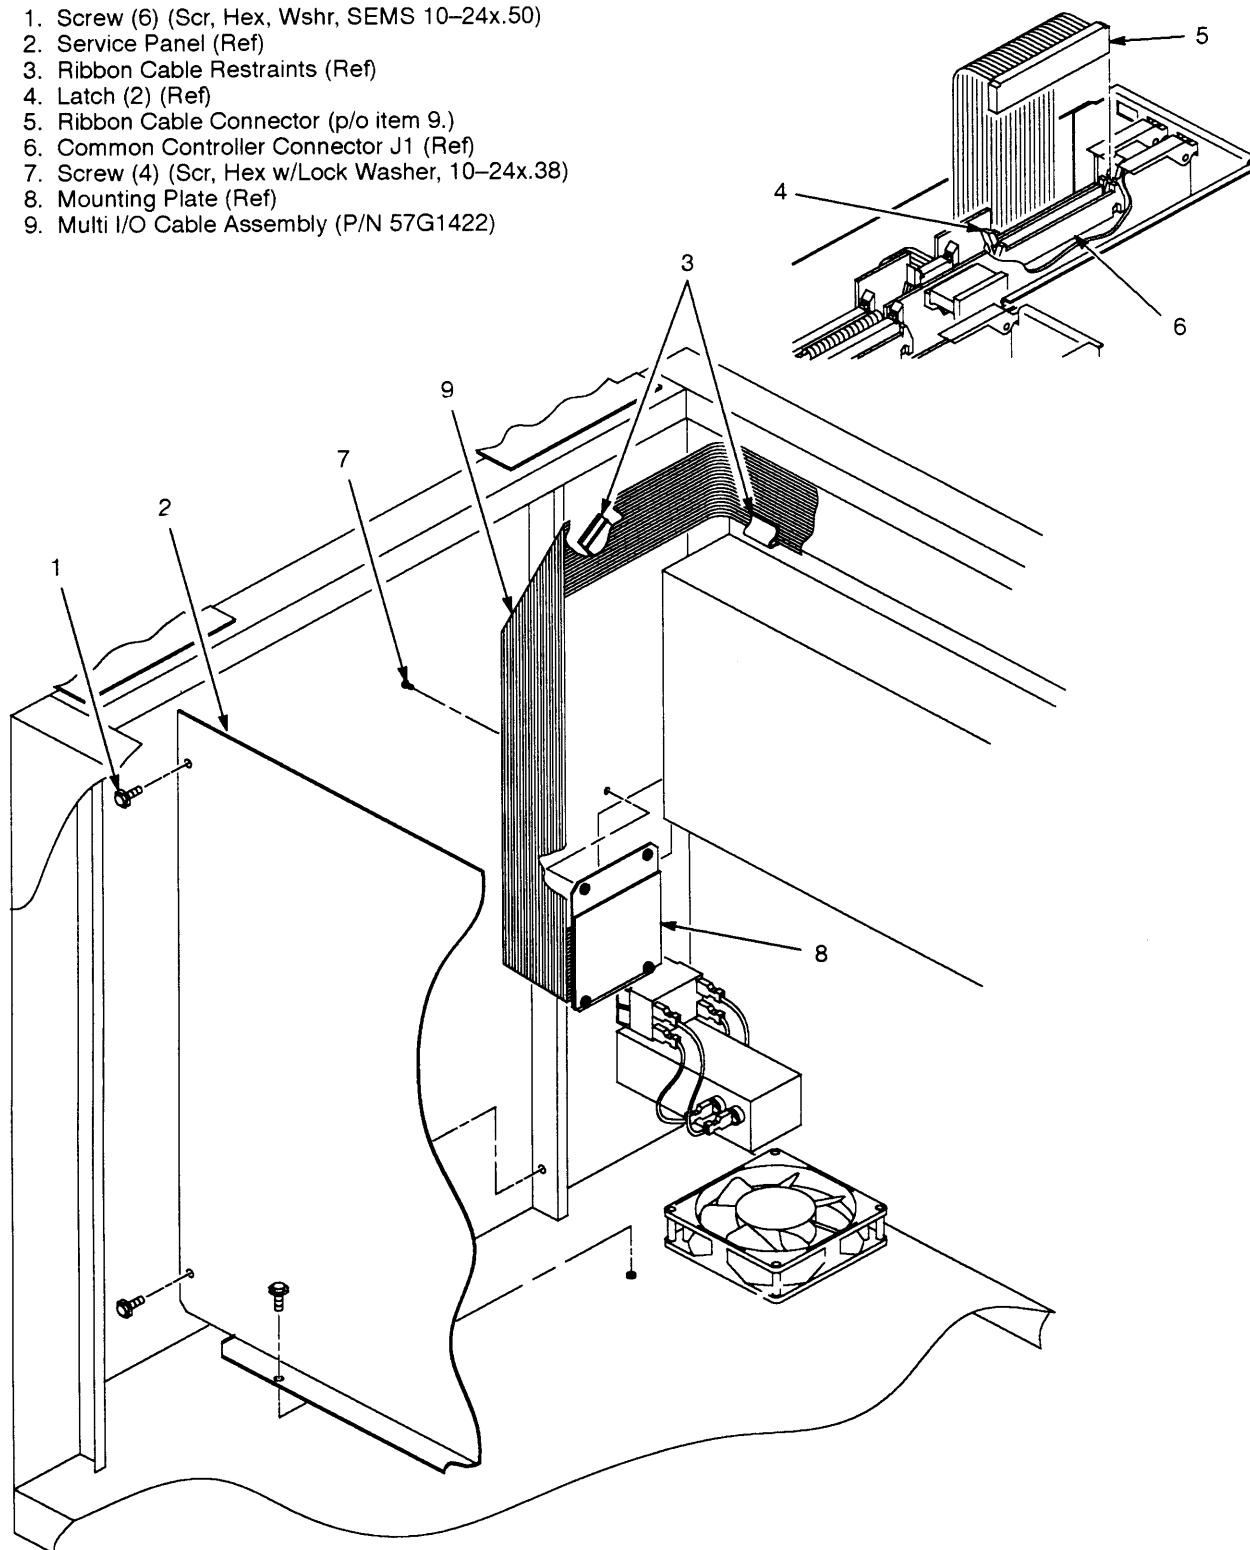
Cable Assembly, Multi I/O, Removal
